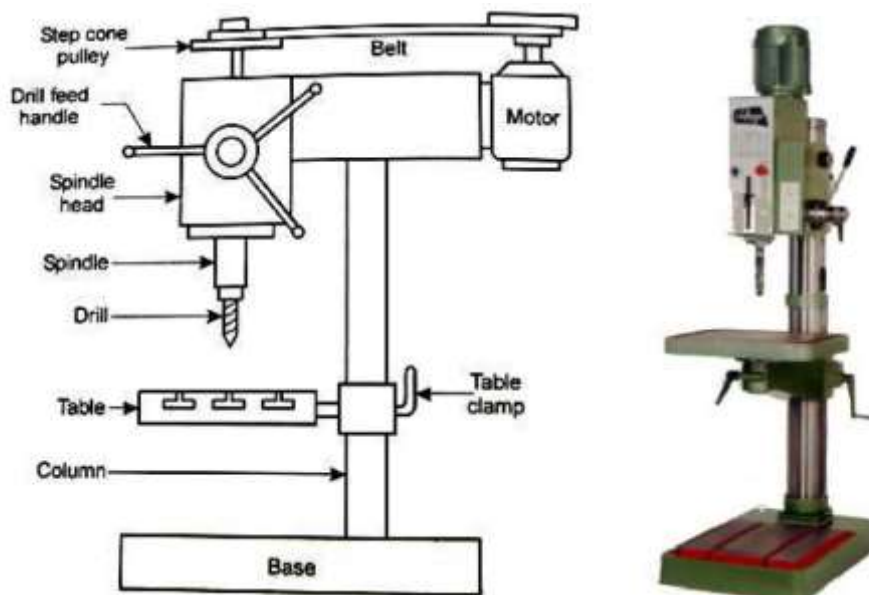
Floor mounting sensitive drilling machine Fig. 3.112 Pillar drilling machine
